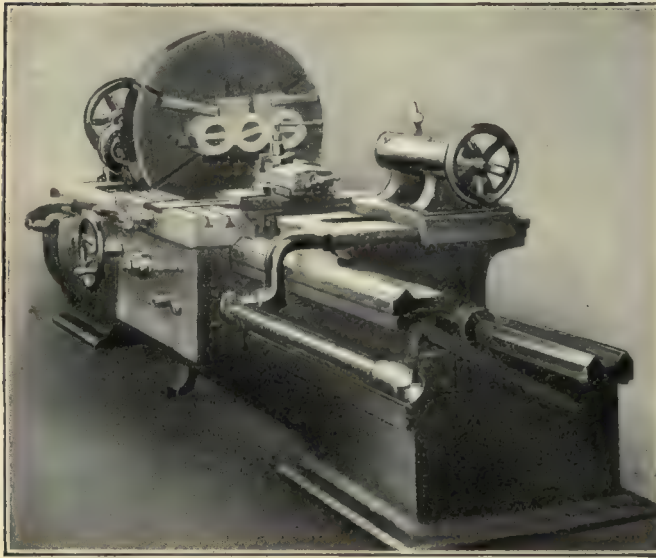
NEW DESIGN FOR HEAVY-DUTY LATHE
